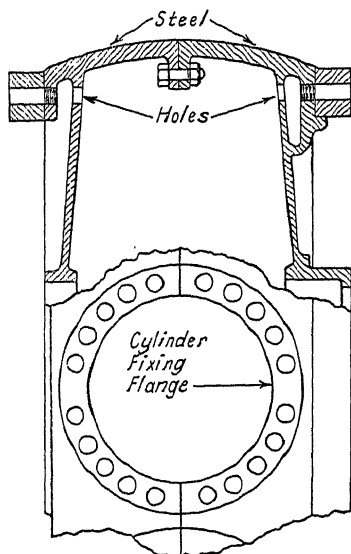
The steel crankcase power section of the Wright G.200 Cyclone engine.
